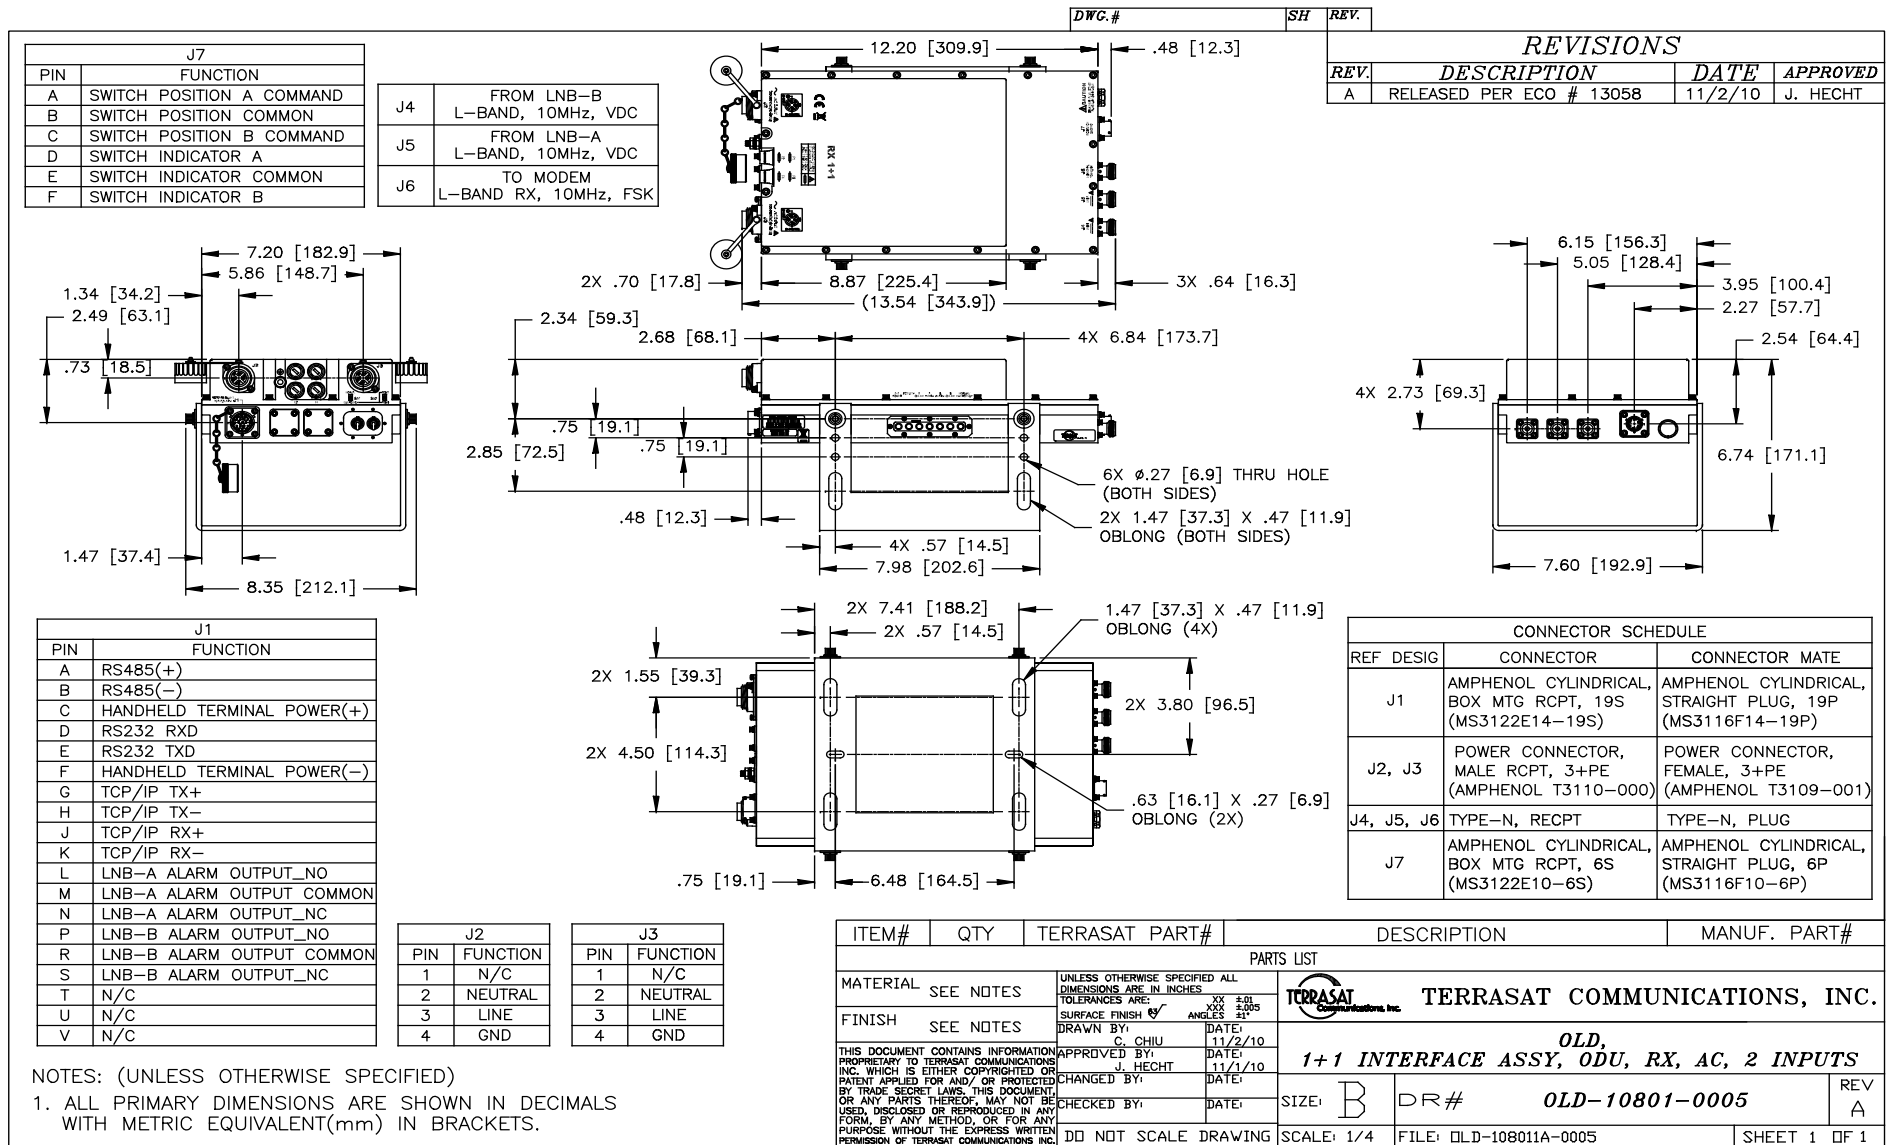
Outline Drawing, OLD-10801-0005, Rev A
